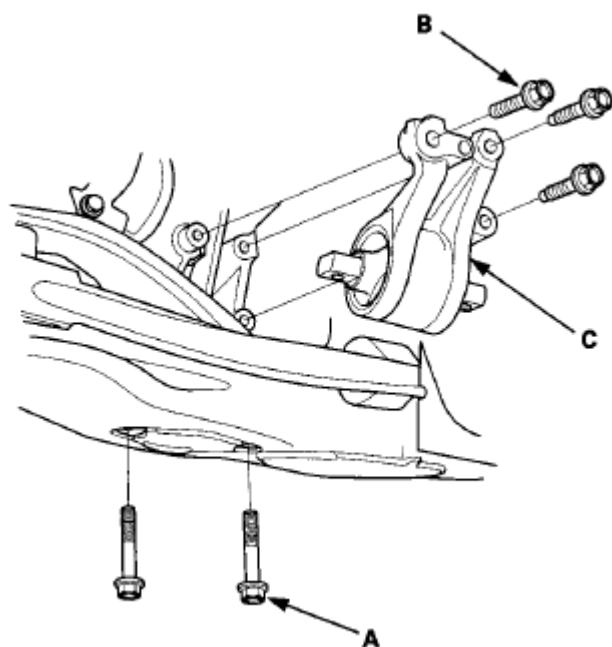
Removing Lower Transmission Mount Mounting Bolts From Subframe Side
